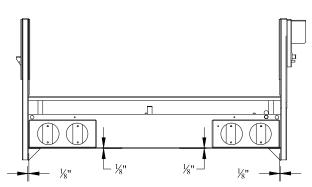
Measurements for welding on older liftgates. 2-light kit is shown, 3-light kit is similar.
